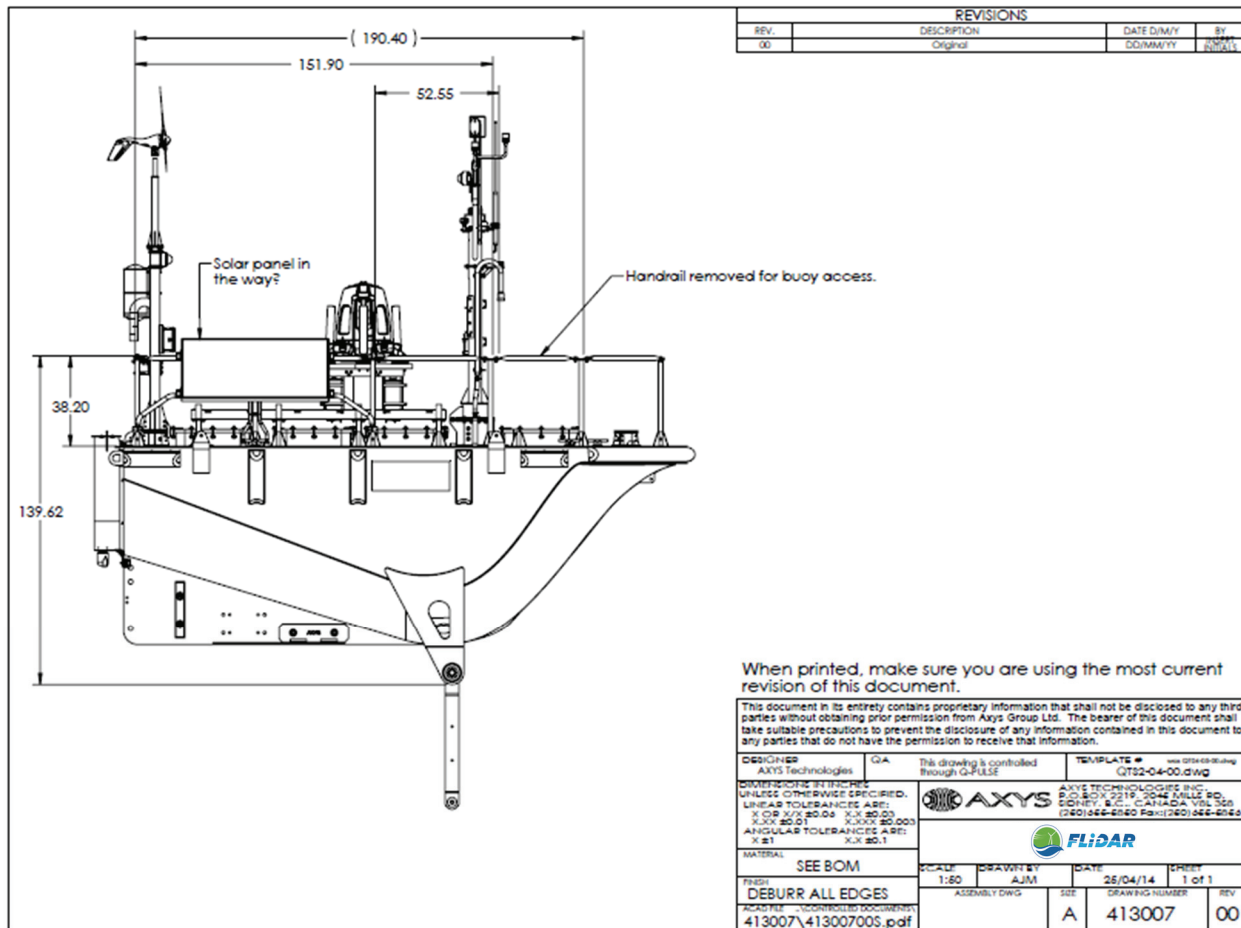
FLiDAR WindSentinel Dimensions – Dual ZephIR Deployment View
